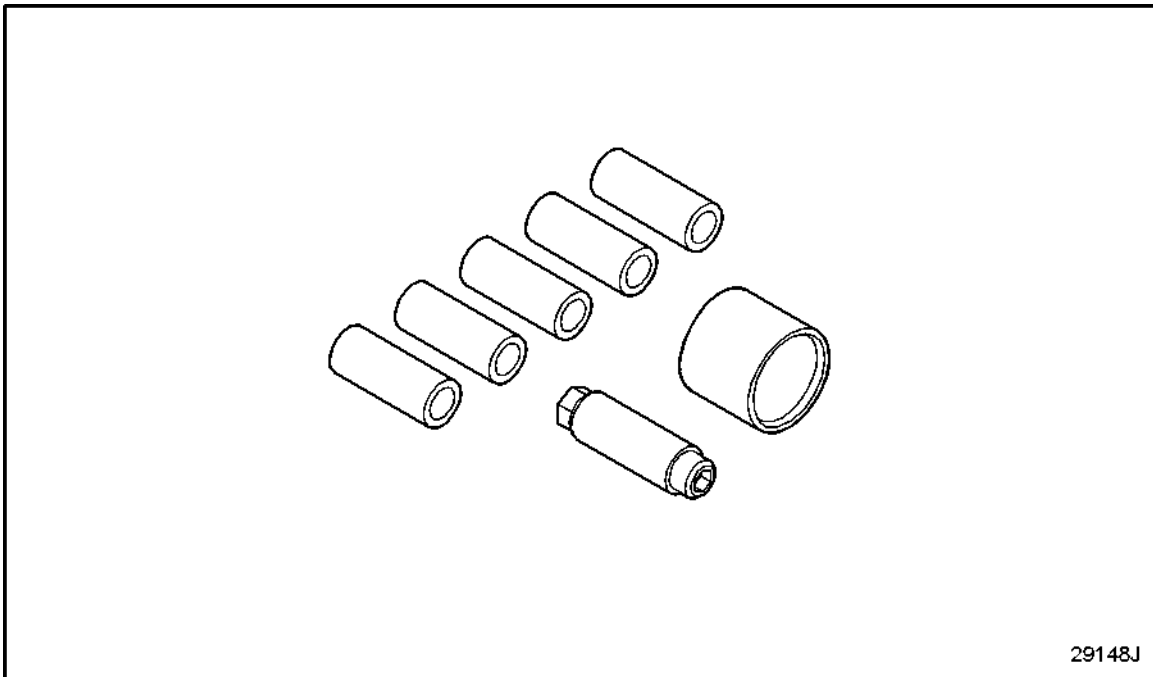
Thrust Spacer Plug & Sleeve INSTJ 29090
